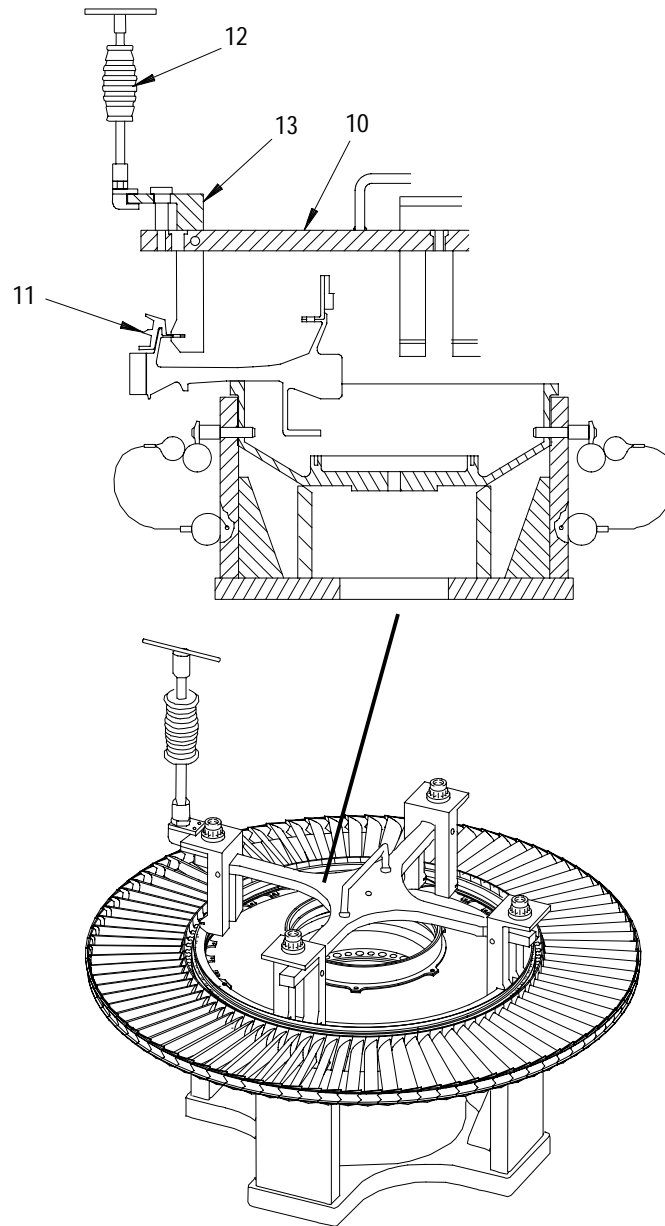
Third Stage Turbine Air Seal - Removal (Sheet 1 of 2)
